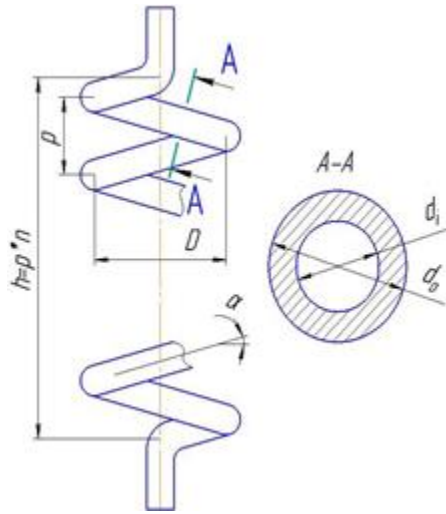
Geometry of a helical hollow spring with annular cross section.
